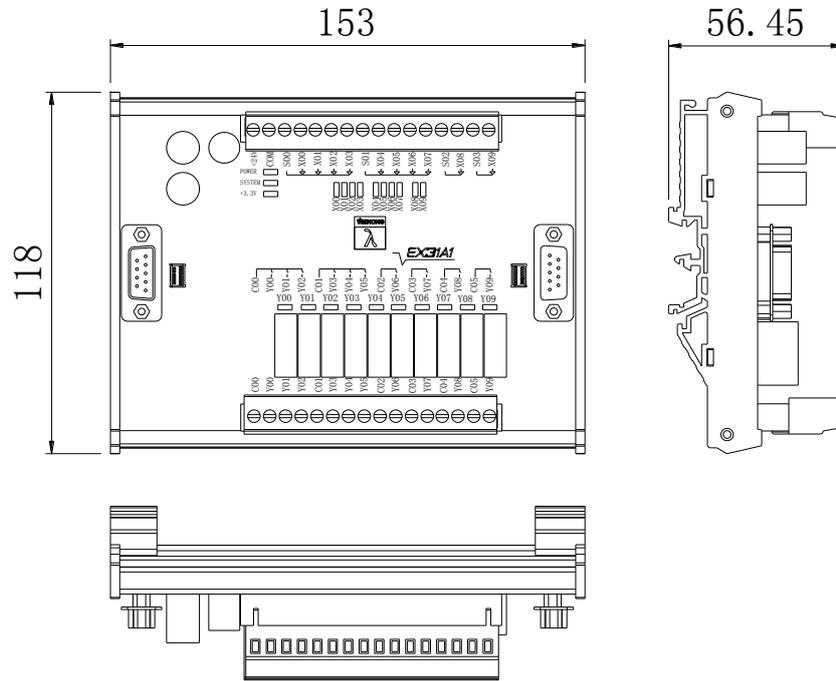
Mounting Dimension of Terminal Board EX31A1
